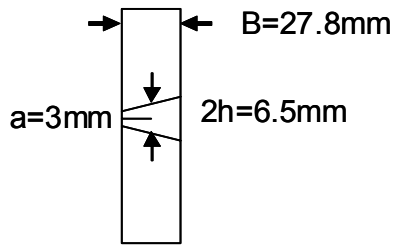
Detail of weld area (circled in Figure 1)
